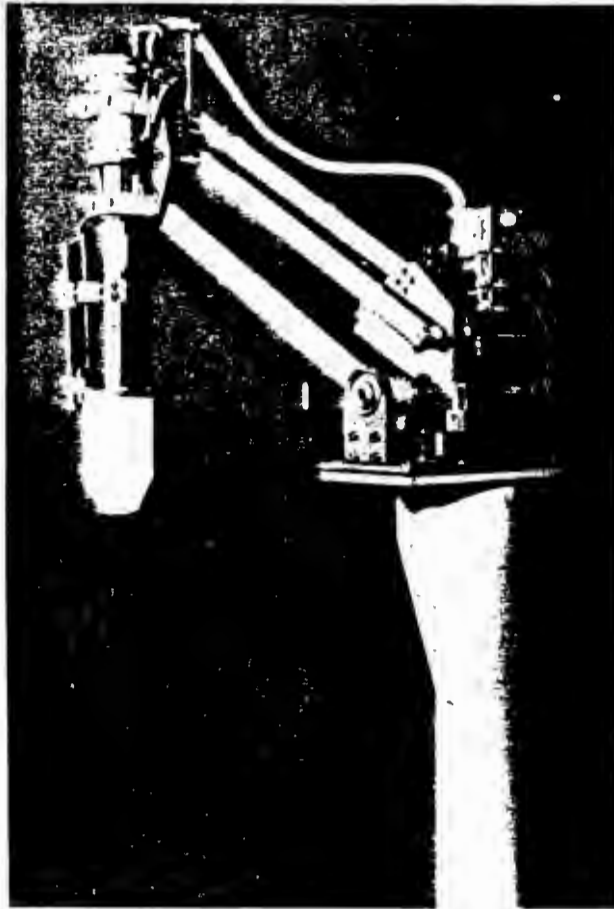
Bottom Filling Ladle (Reprinted from [7])
